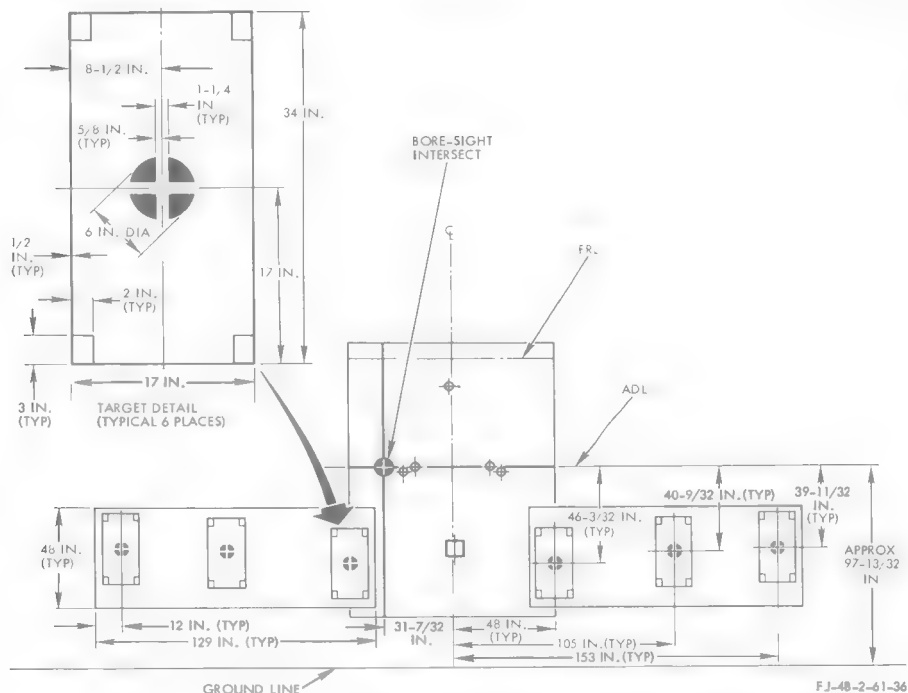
External Store Adapter Beam Bore-sighting Target Board Dimensions
